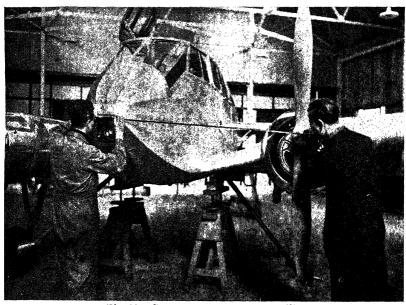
CHECK RIGGING DIMENSIONS (3).
